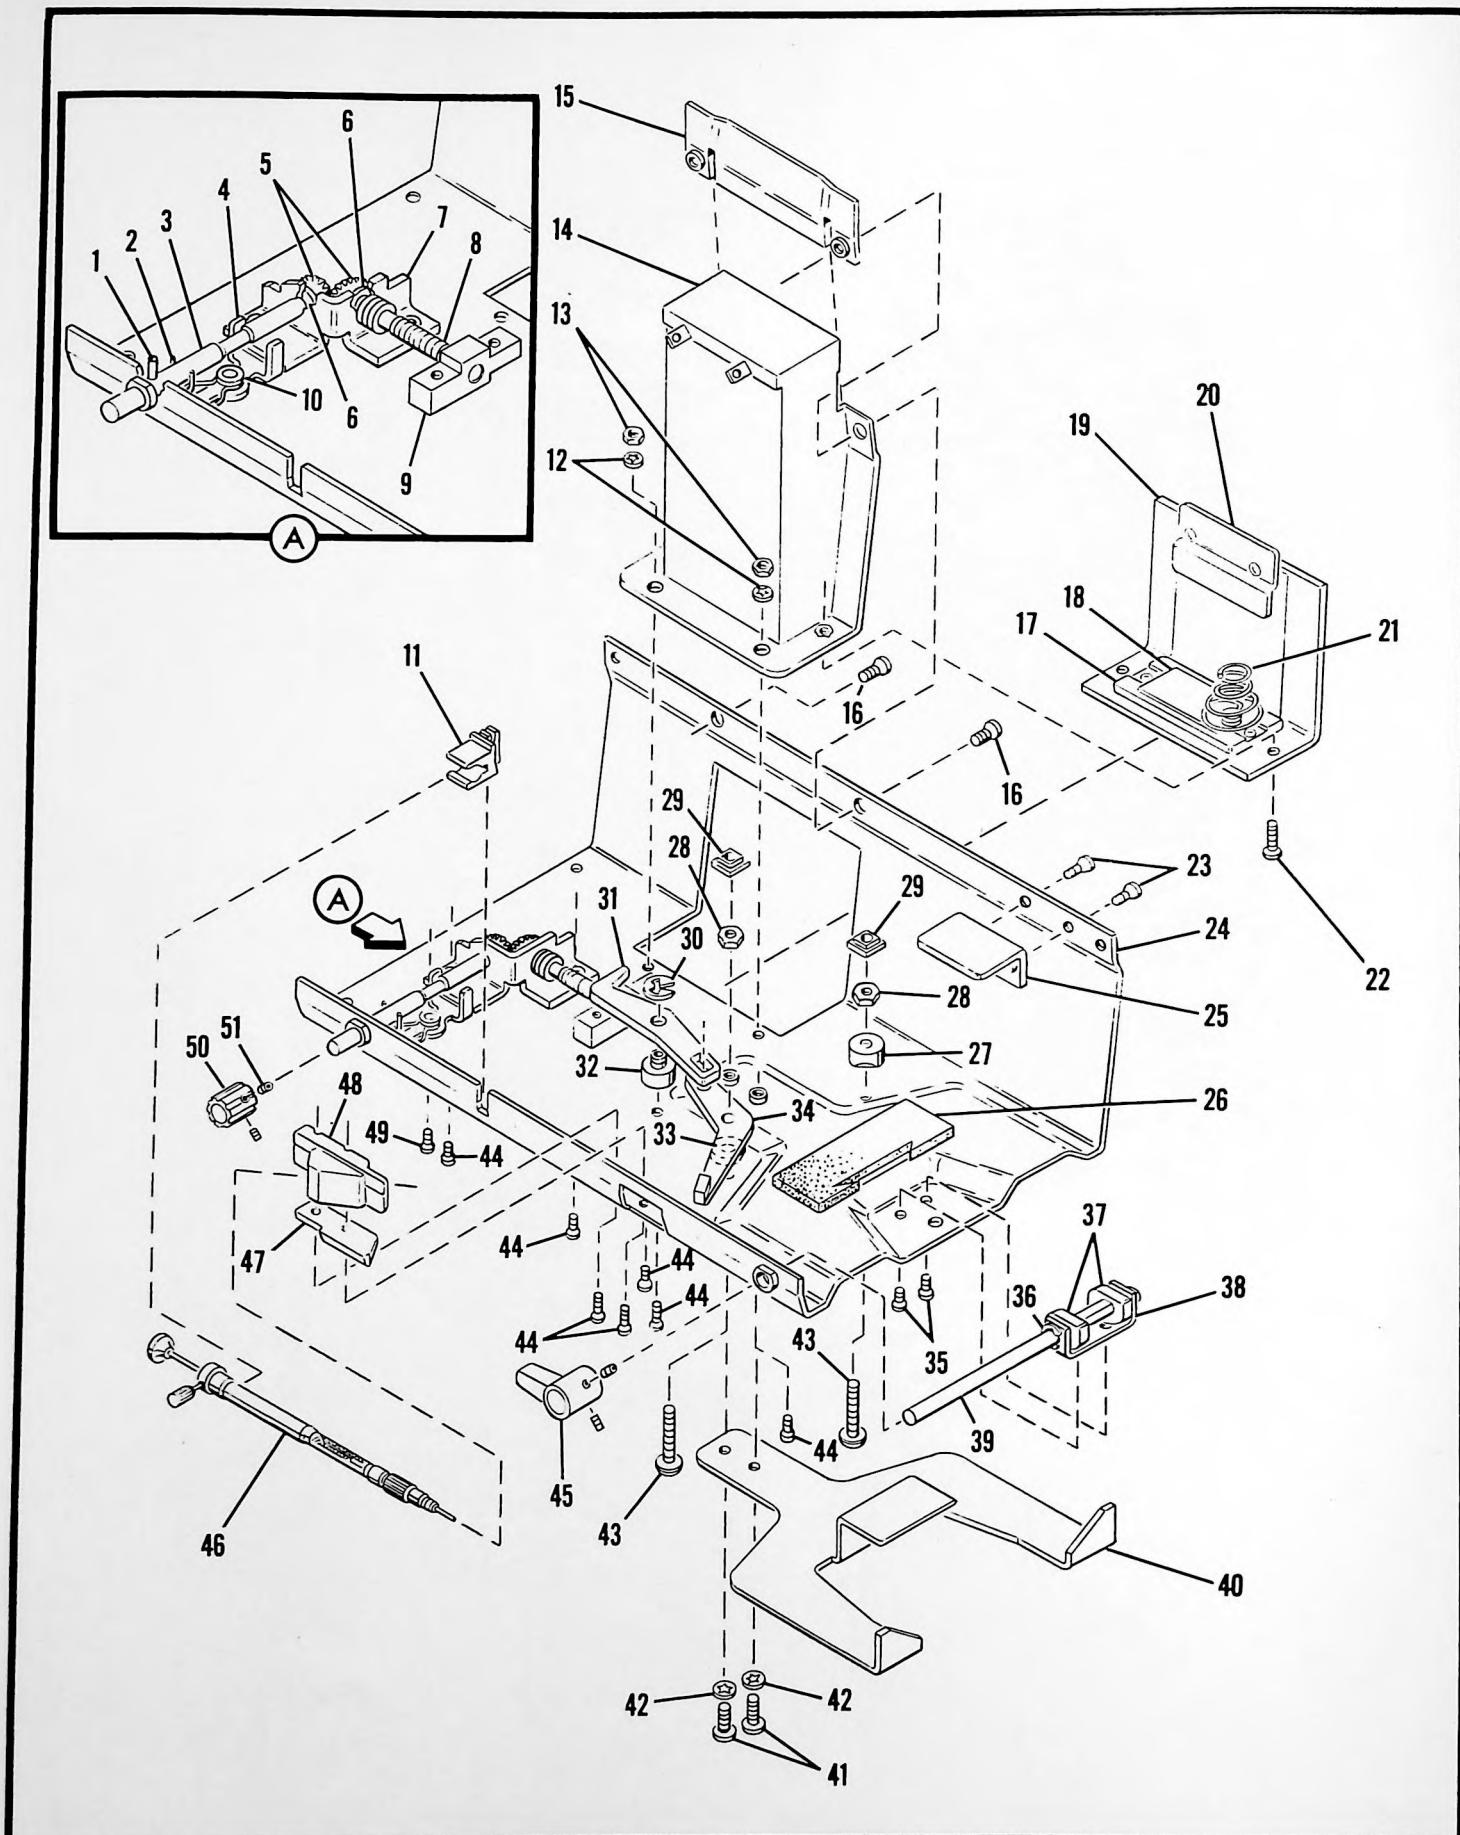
Camera Mirror and Lamp Assembly (Sheet 2 of 2)
